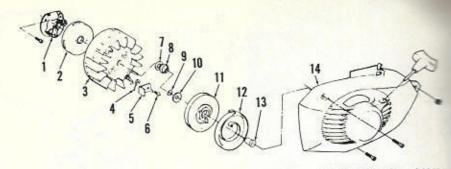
Exploded view of Ignition and rewind starter used on models 944, 947, 1610 and 1612.
